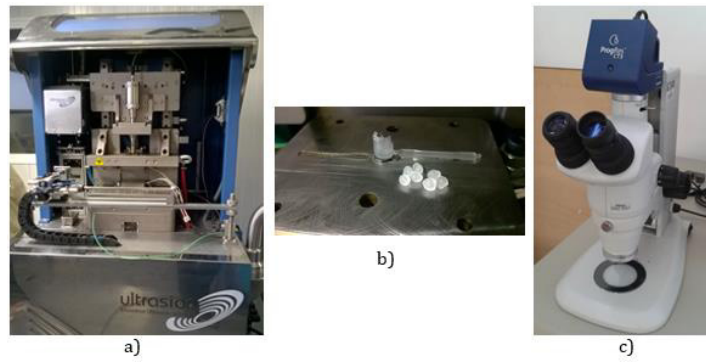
Experimental setup in: a) Sonorus 1G, b) mold, part and pellets, c) Stereomicroscope Nikon SMZ-745T
